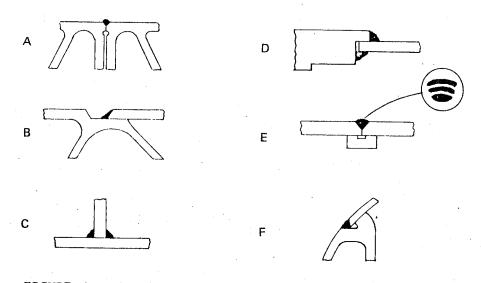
WELD DETAILS OF SIX JOINTS ON MF77 BODY SHELL STRUCTURE USE PARAMETERS SHOWN IN TABLE 6.
